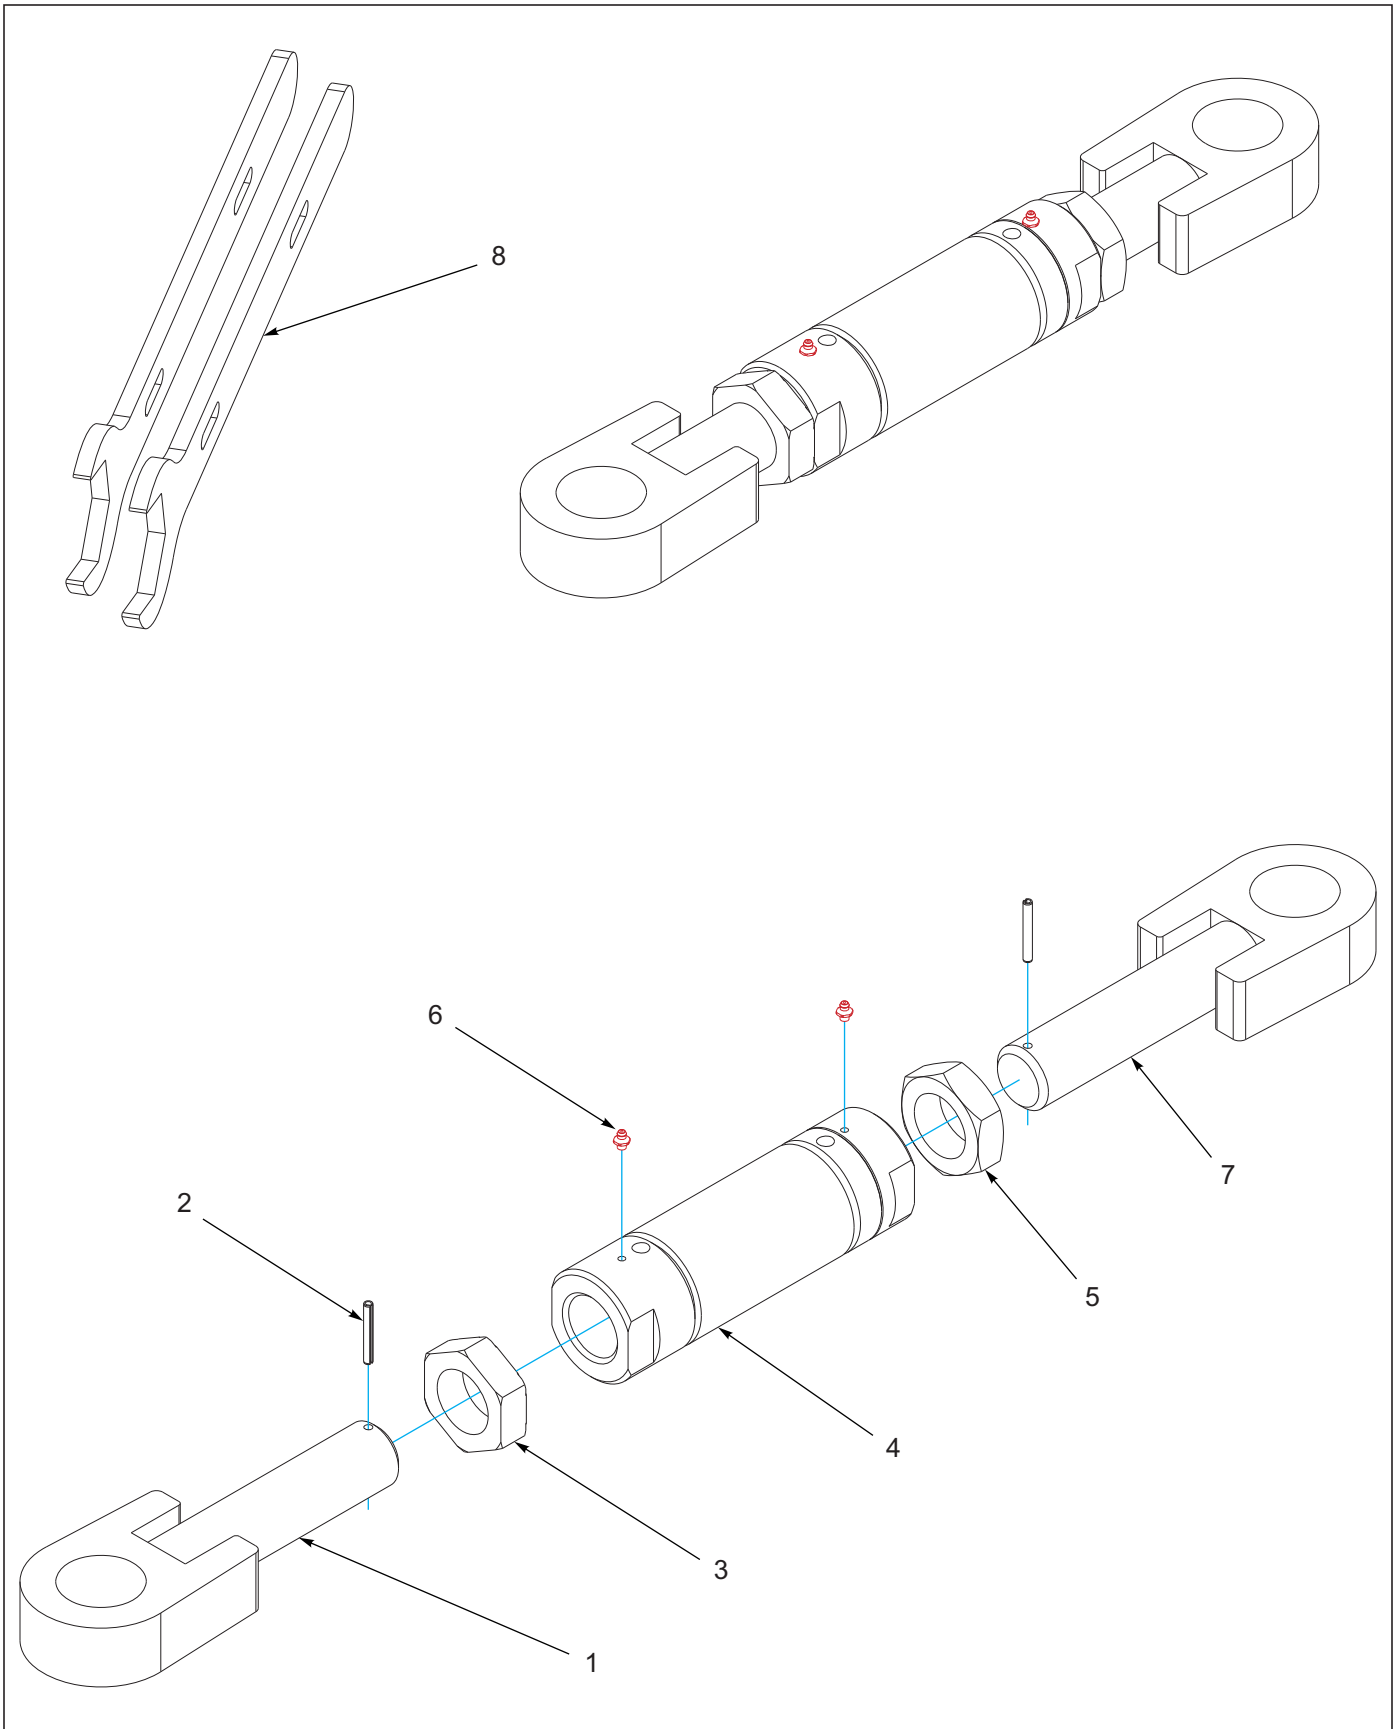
Side Draft Assembly - Manual (Before 8-31-2018)
